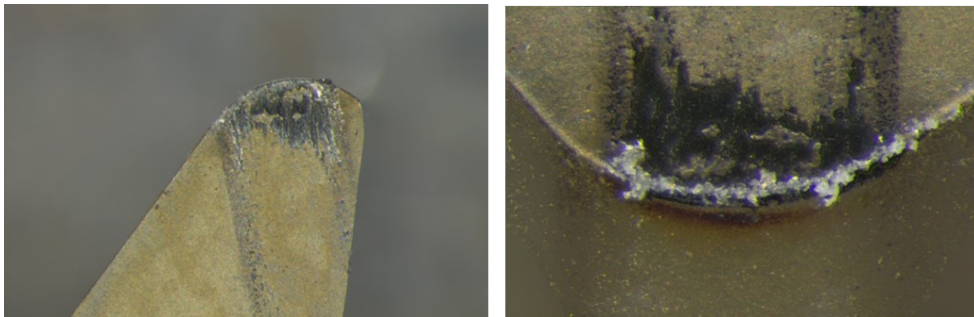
C4 coating machined at 60 m/min for 20 seconds in HP air, cut tools rake (left) and overview (right).
